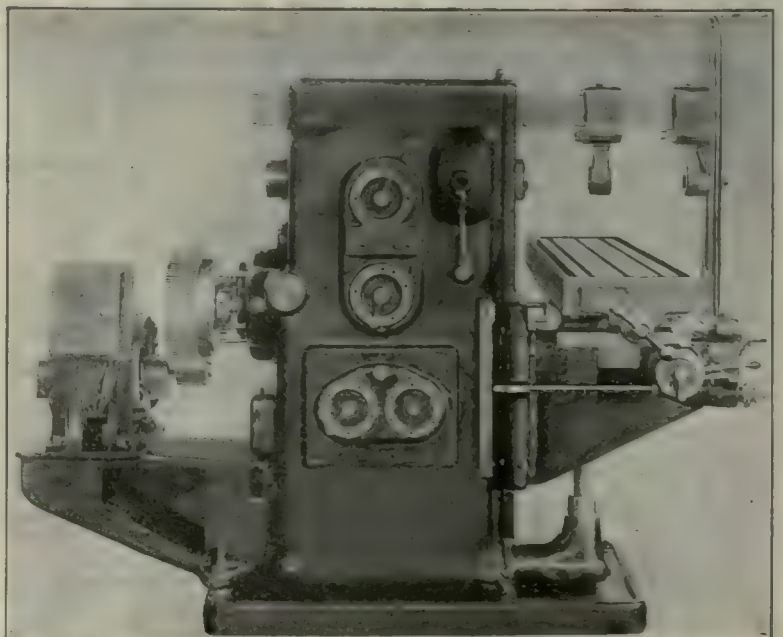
SIDE VIEW SHOWING SPEED AND FEED CONTROLS
